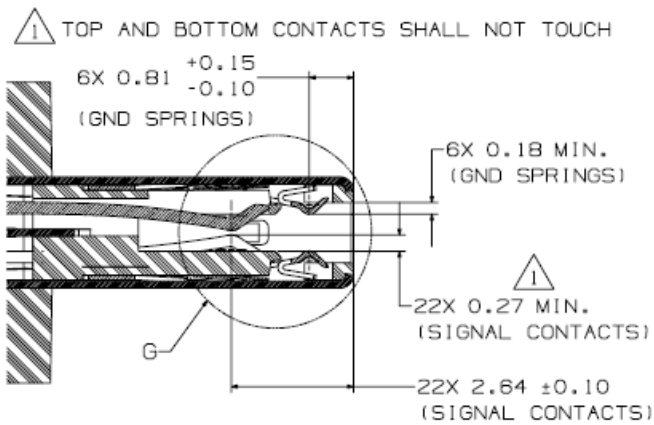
USB Full-Featured Type-C Plug Interface Dimensions, cont.
